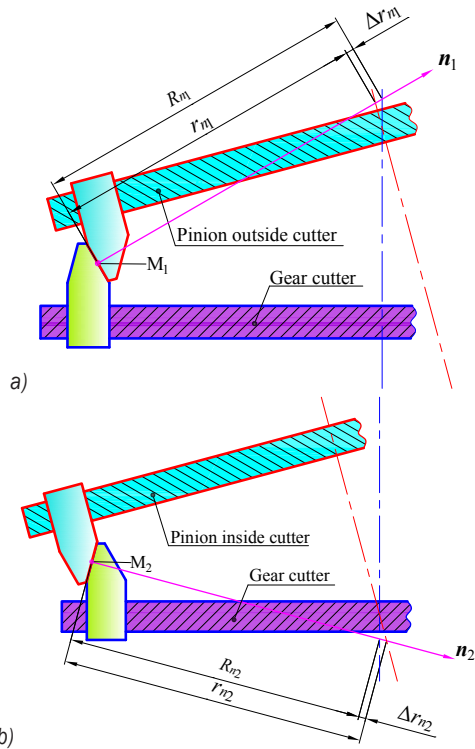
Relative position of gear and pinion cutters in duplex helical method; a) drive side and b) coast side
